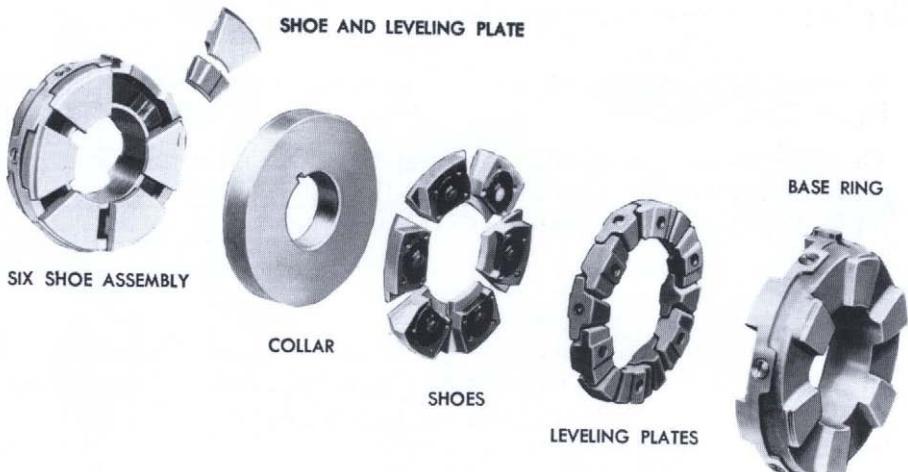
Small Kingsbury six-shoe, two direction thrust bearing. Left-hand group assembled, except for one shoe and 'upper' leveling plate. Right-hand group disassembled (Courtesy of Kingsbury, Inc.)
